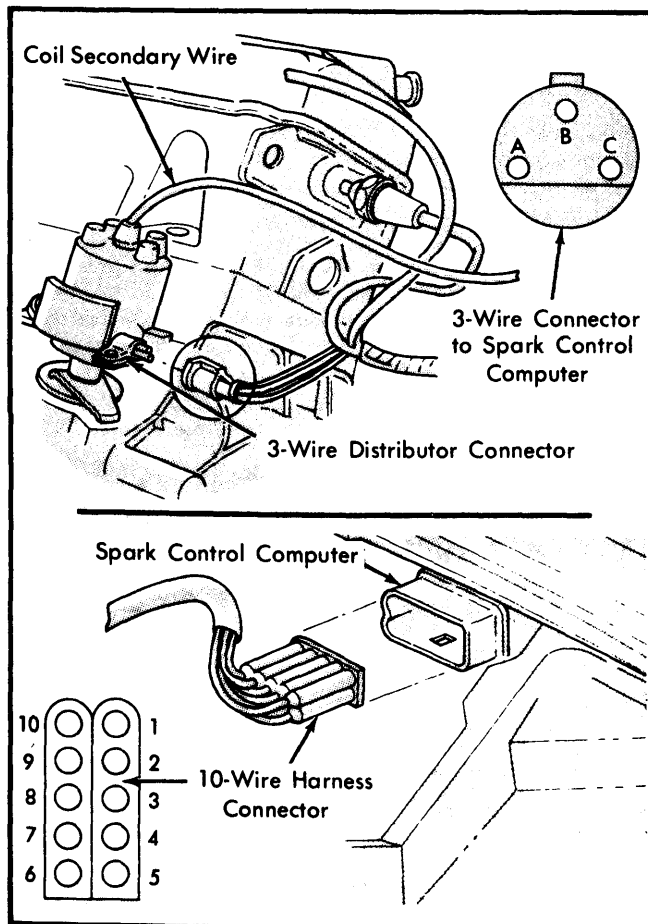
Disconnecting Wiring Harnesses for Tests (Pin Locations Shown)
